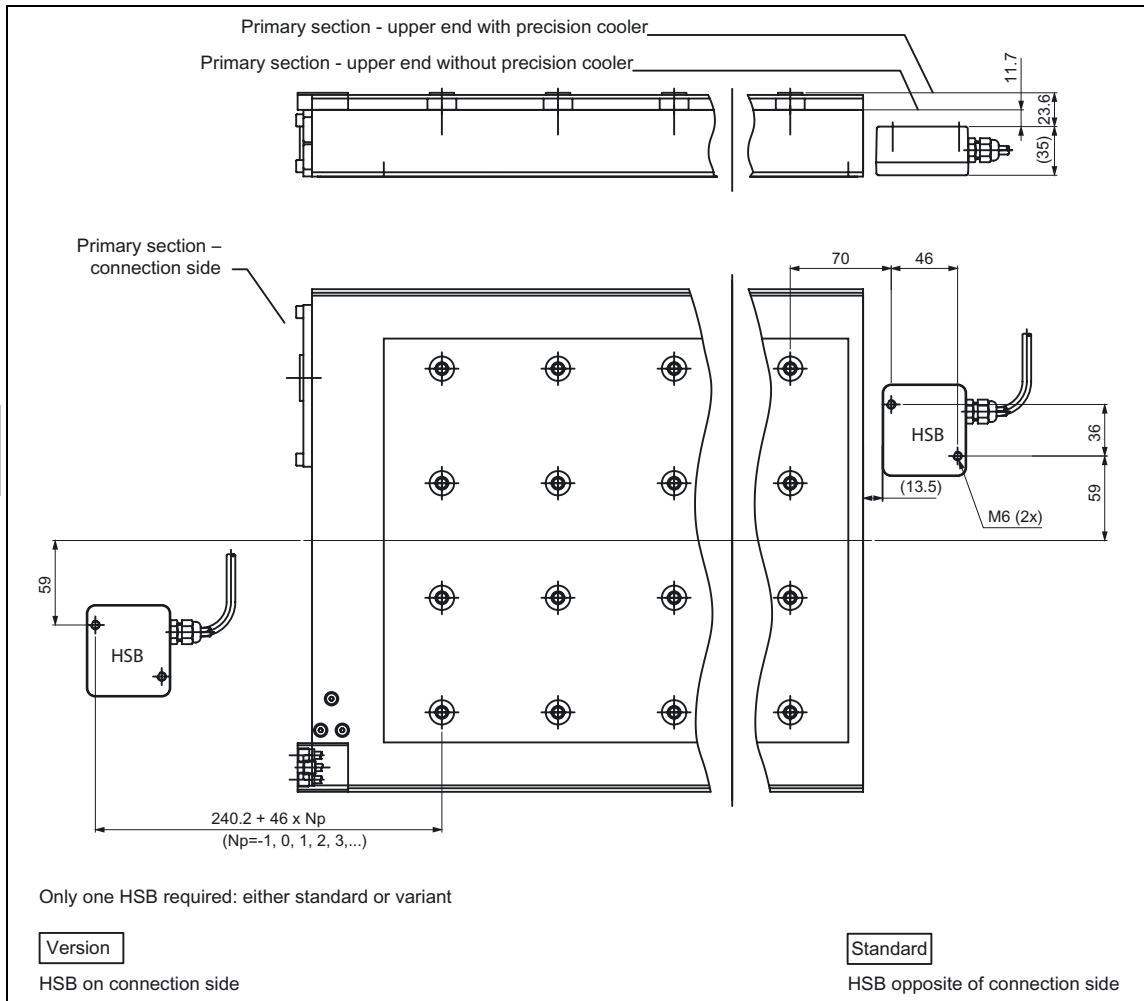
Hall sensor box (HSB) with straight cable outlet for the 1FN3900 motor models
